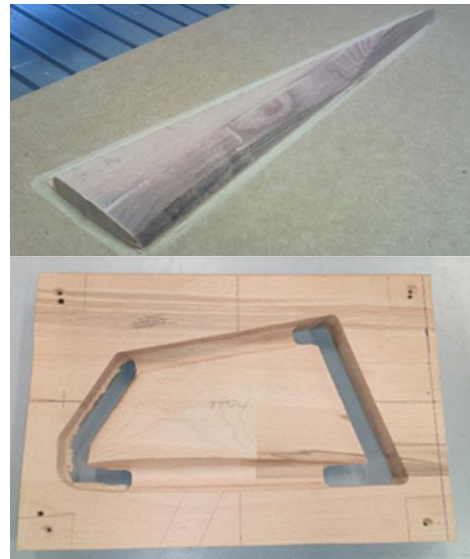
Piece milled, only at one side (top) and piece milled both sides with lateral tabs (bottom)
